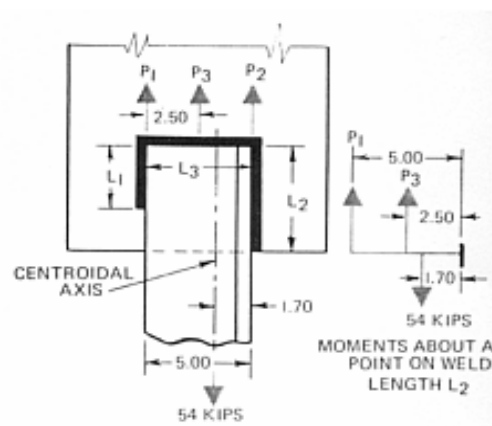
Fillet weld on sides and end of angle iron.
